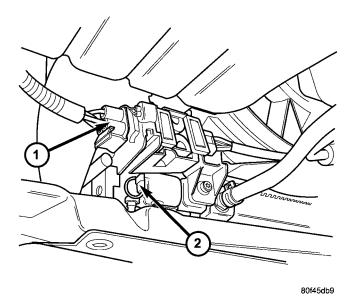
Radiator Fan Connector - 2.4L Turbo
